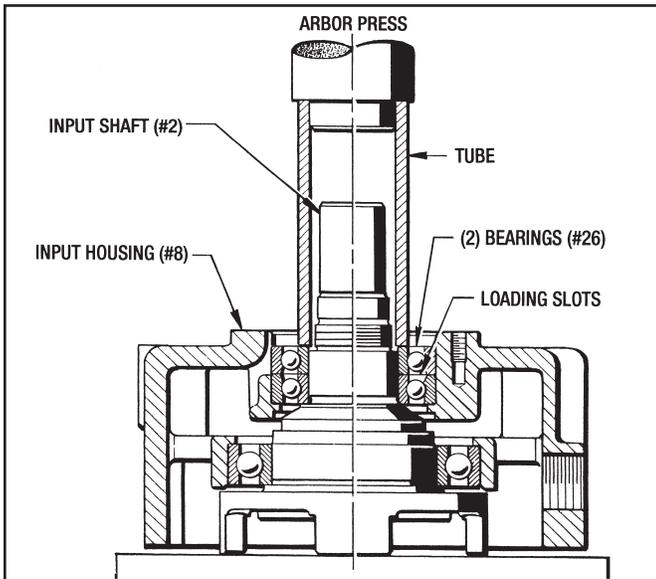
Pressing Bearings (#26) into Input Housing
